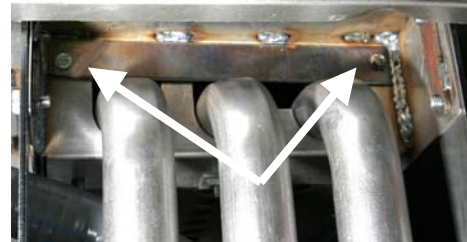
Two 1/4" screws secure the brace holding the burner tubes.
